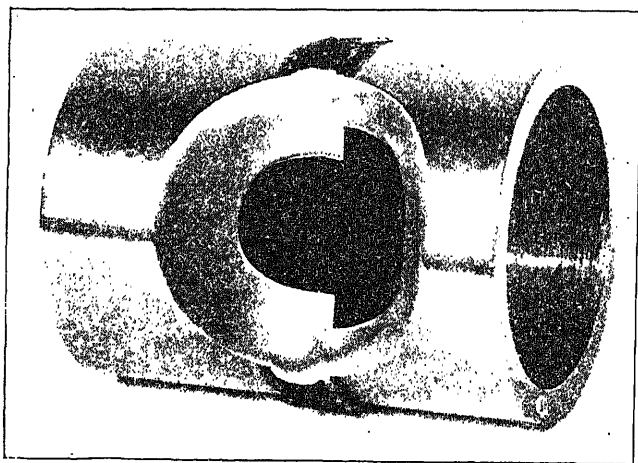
Piloted Cup Automatically Welded by Metallic-Electrode Arc Process to Tube to Form 75-MM. Shrapnel Shell.
